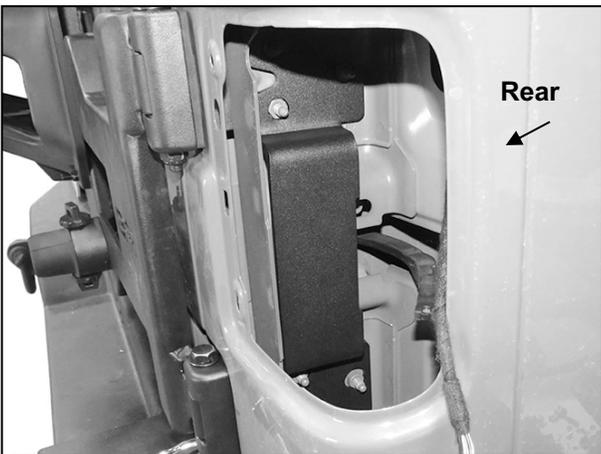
Insert hinges on rear door into position and attach to inner body panel (figure 12)
